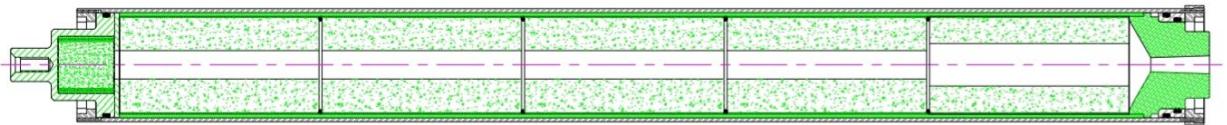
Assembled Pro75-5G Dual Thrust motor.
